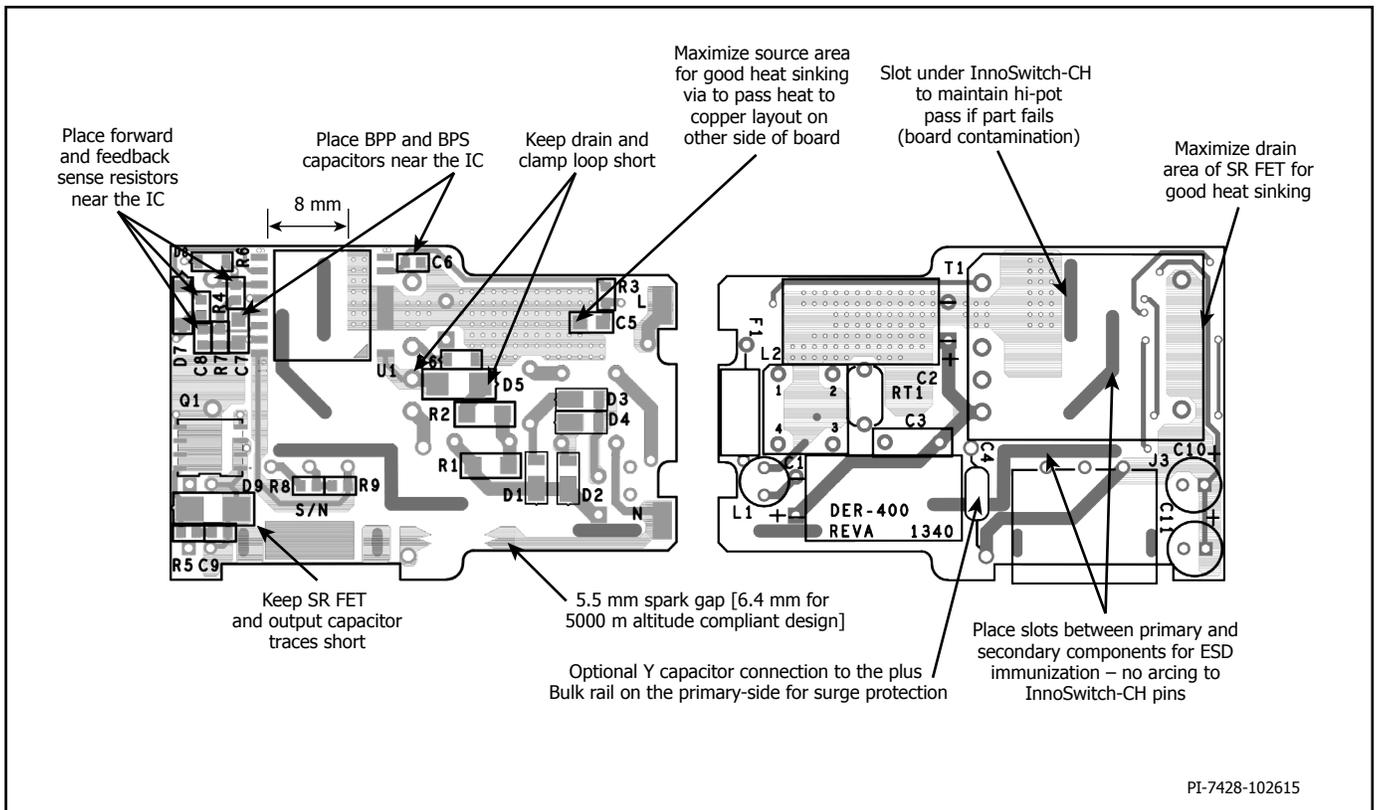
PCB Layout Guidelines. Bottom (Left Side), Top (Right Side).
